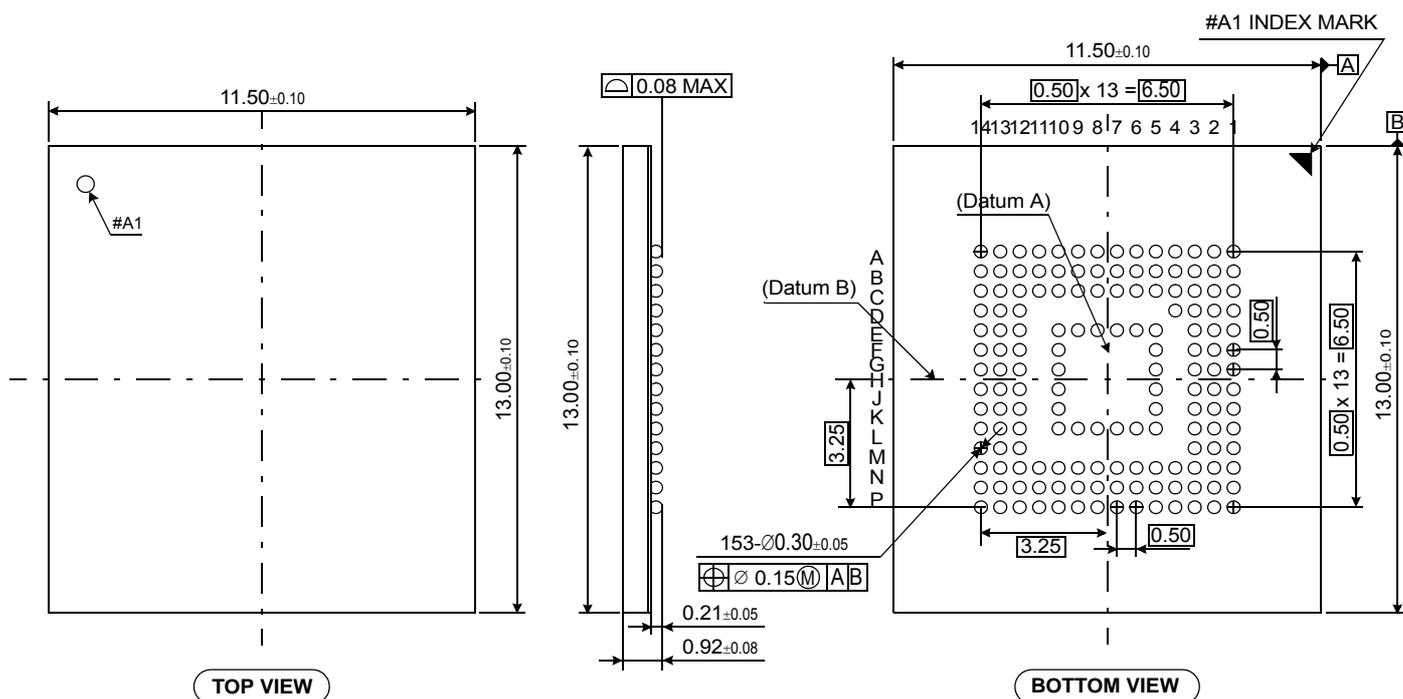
11.5mm x 13mm x 1.0mm Package Dimension
